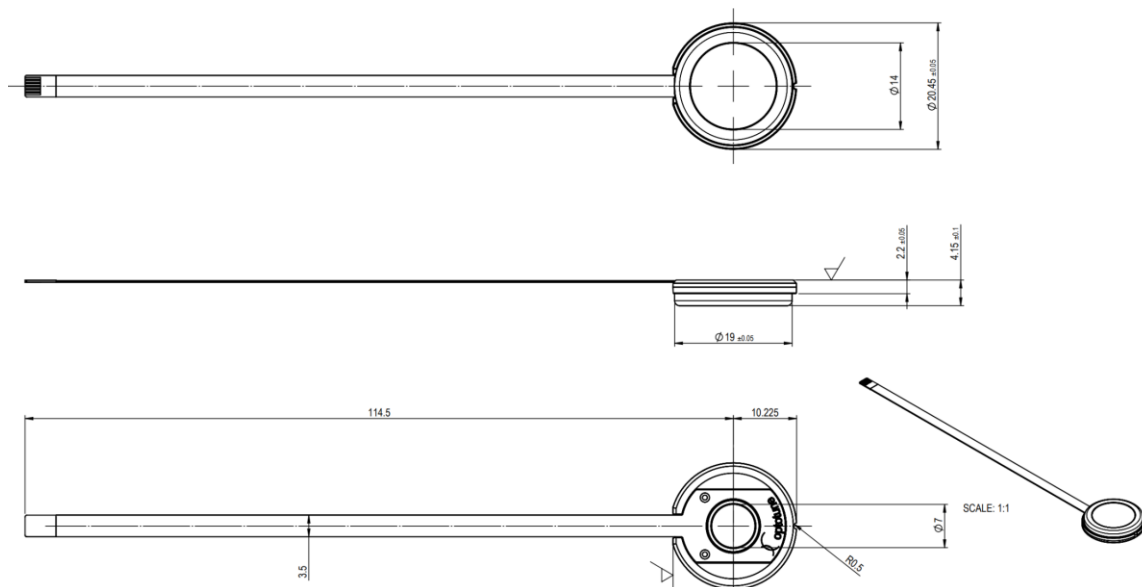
Mechanical drawing of the EL-7-20-TC-VIS-16D (unit: mm)
